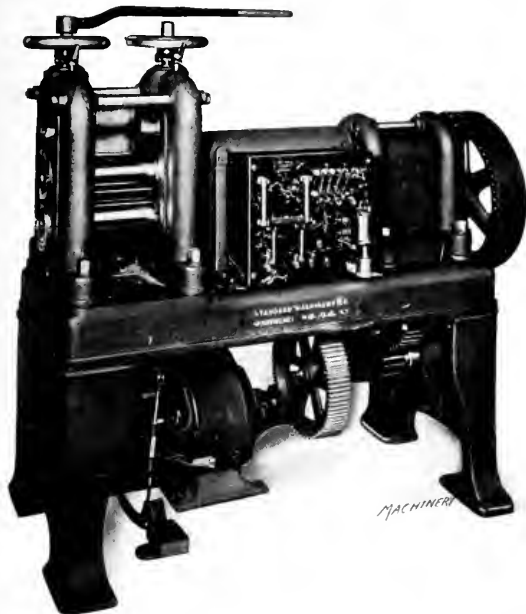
Standard Rolling Mill with Constant Speed Motor Drive
